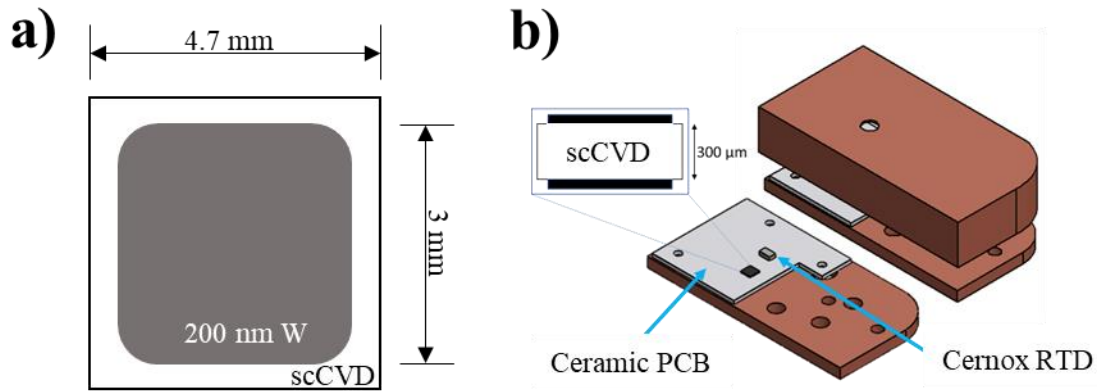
Detector assembly. a) Electrode configuration on the diamond crystal b) Diamond mounted on PCB.
